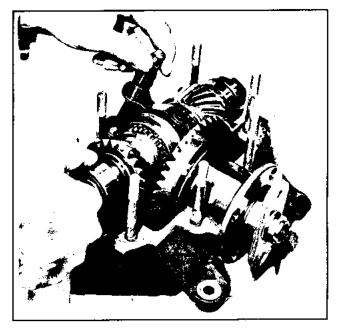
D-43. Removing Shifter Fork and Drive Shaft assembly
